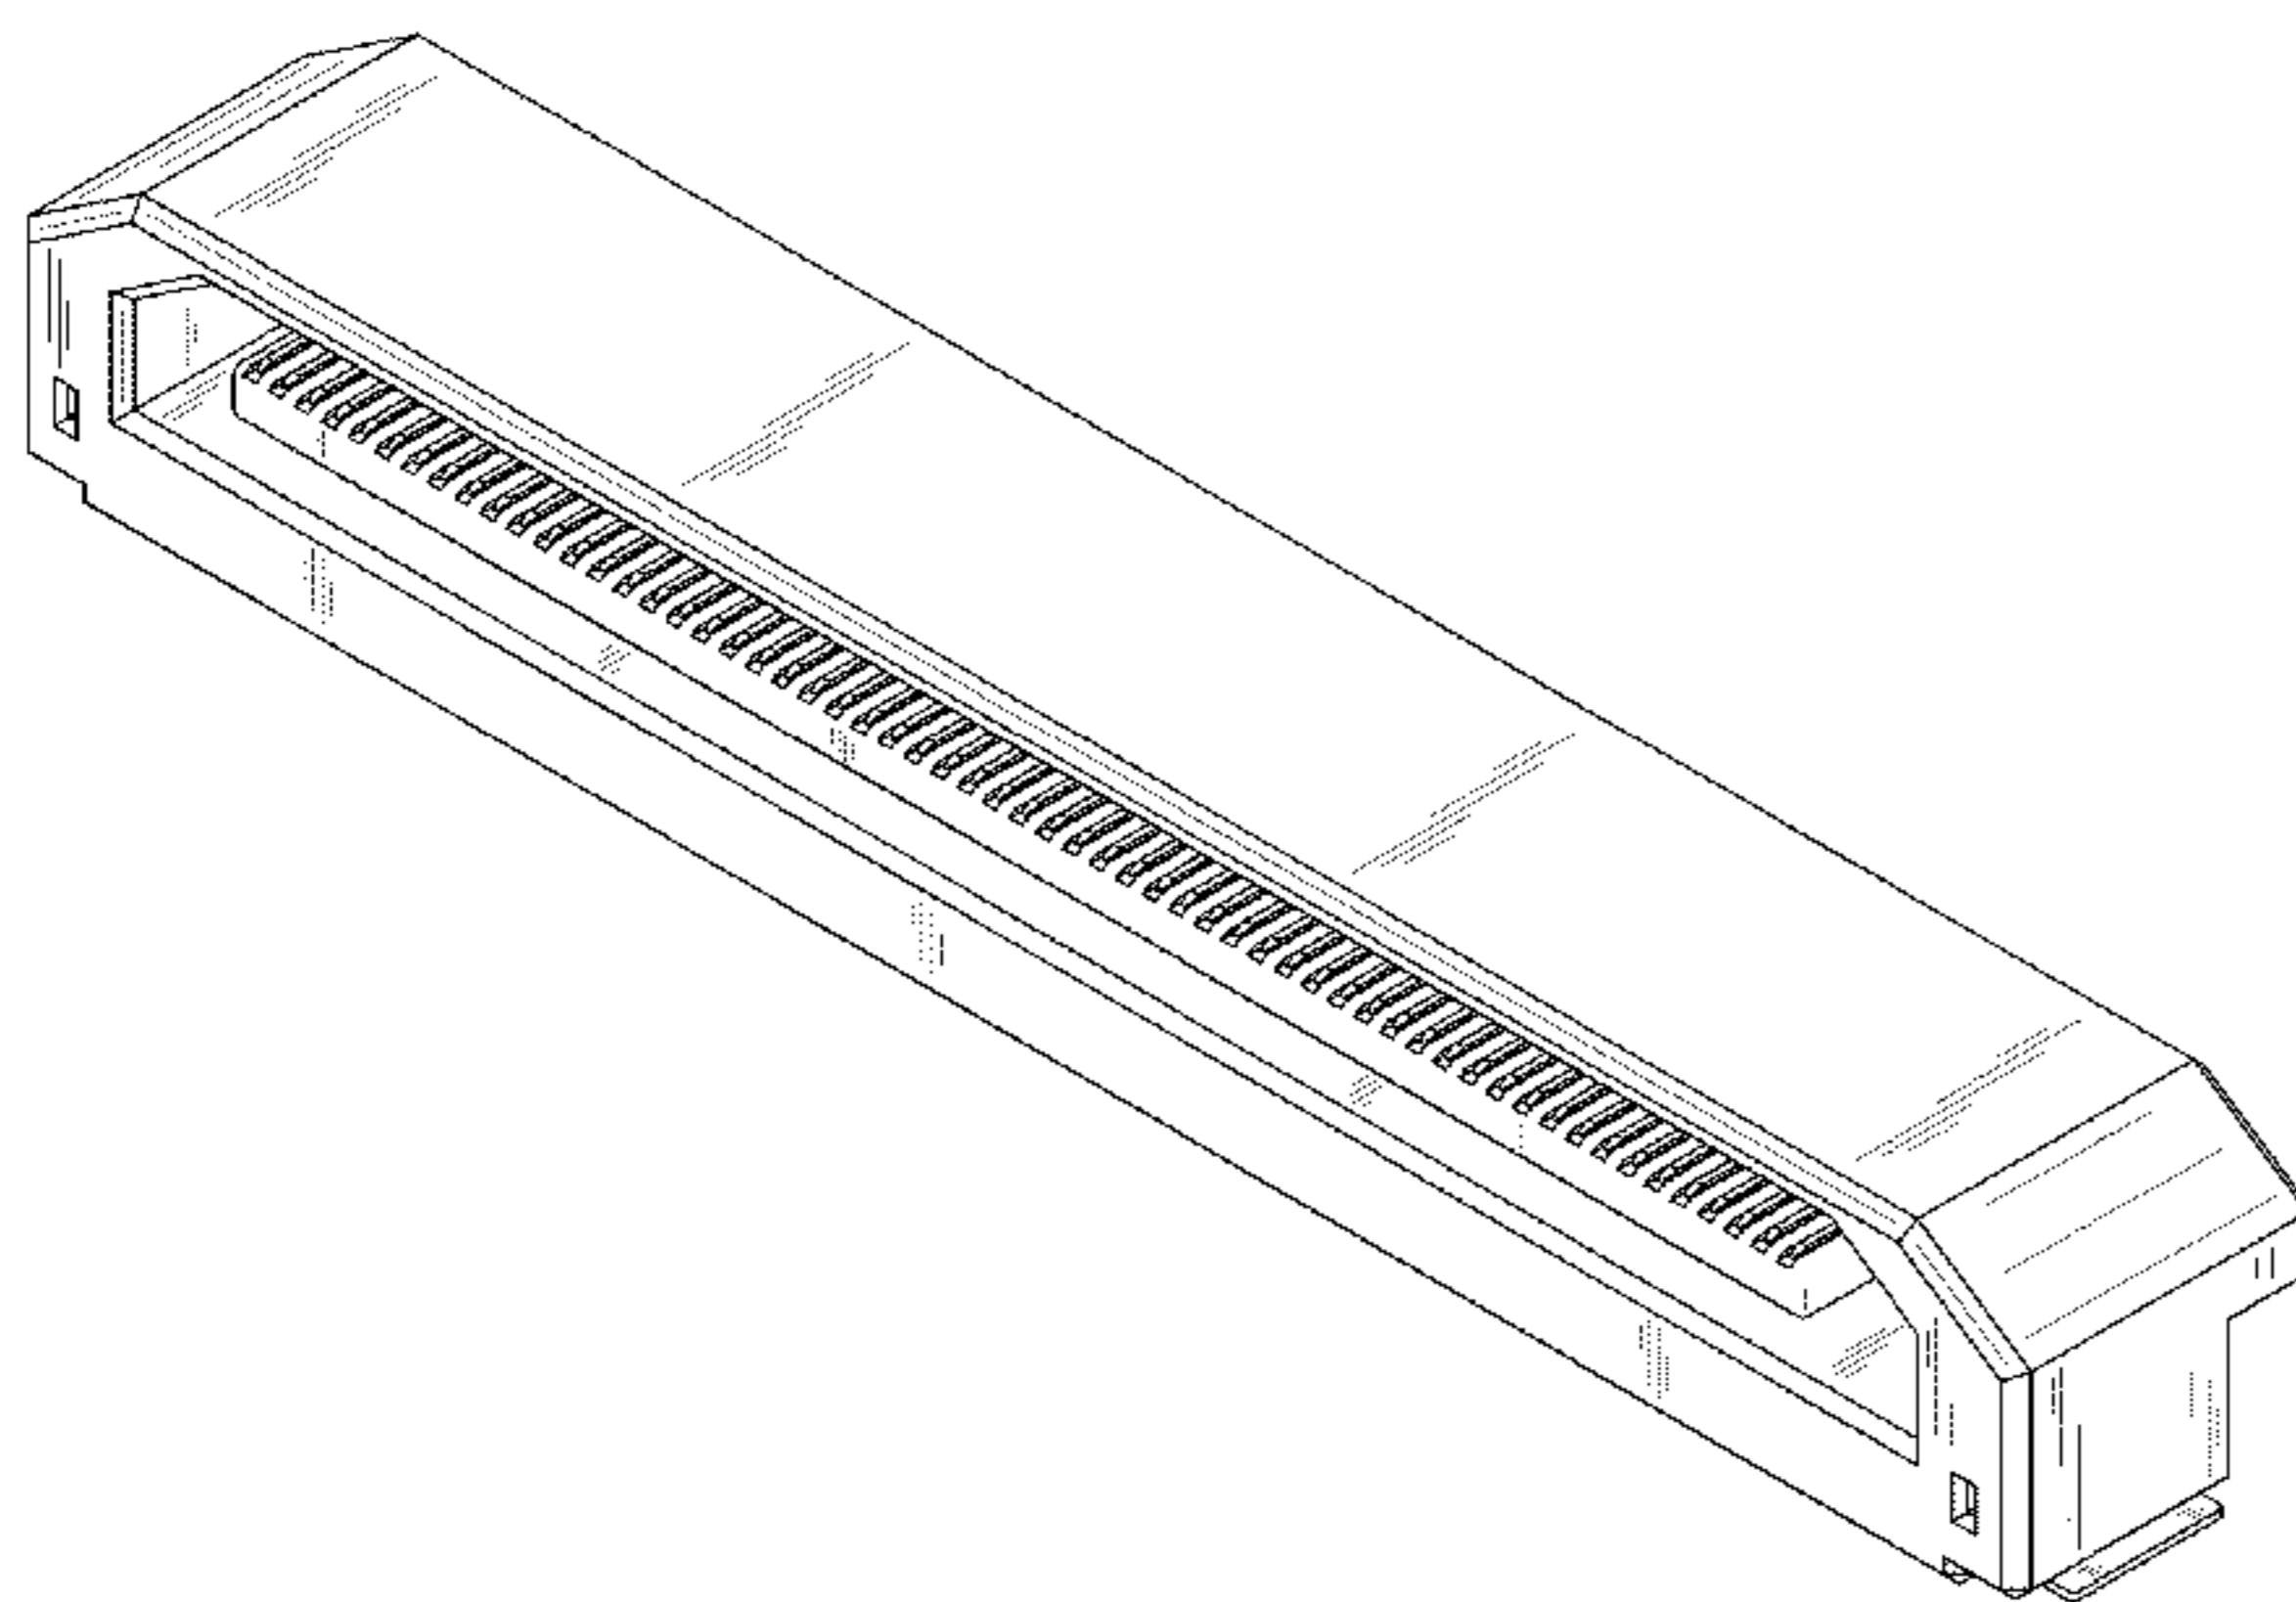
is a right front perspective view showing the bottom thereof; and,
